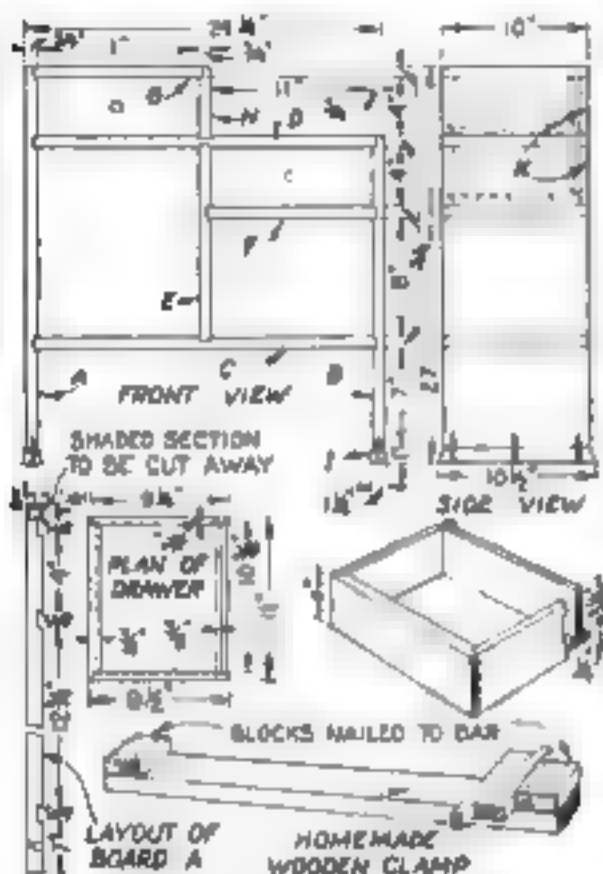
Front and side views, details of drawer, layout for dados, and a homemade clamp
